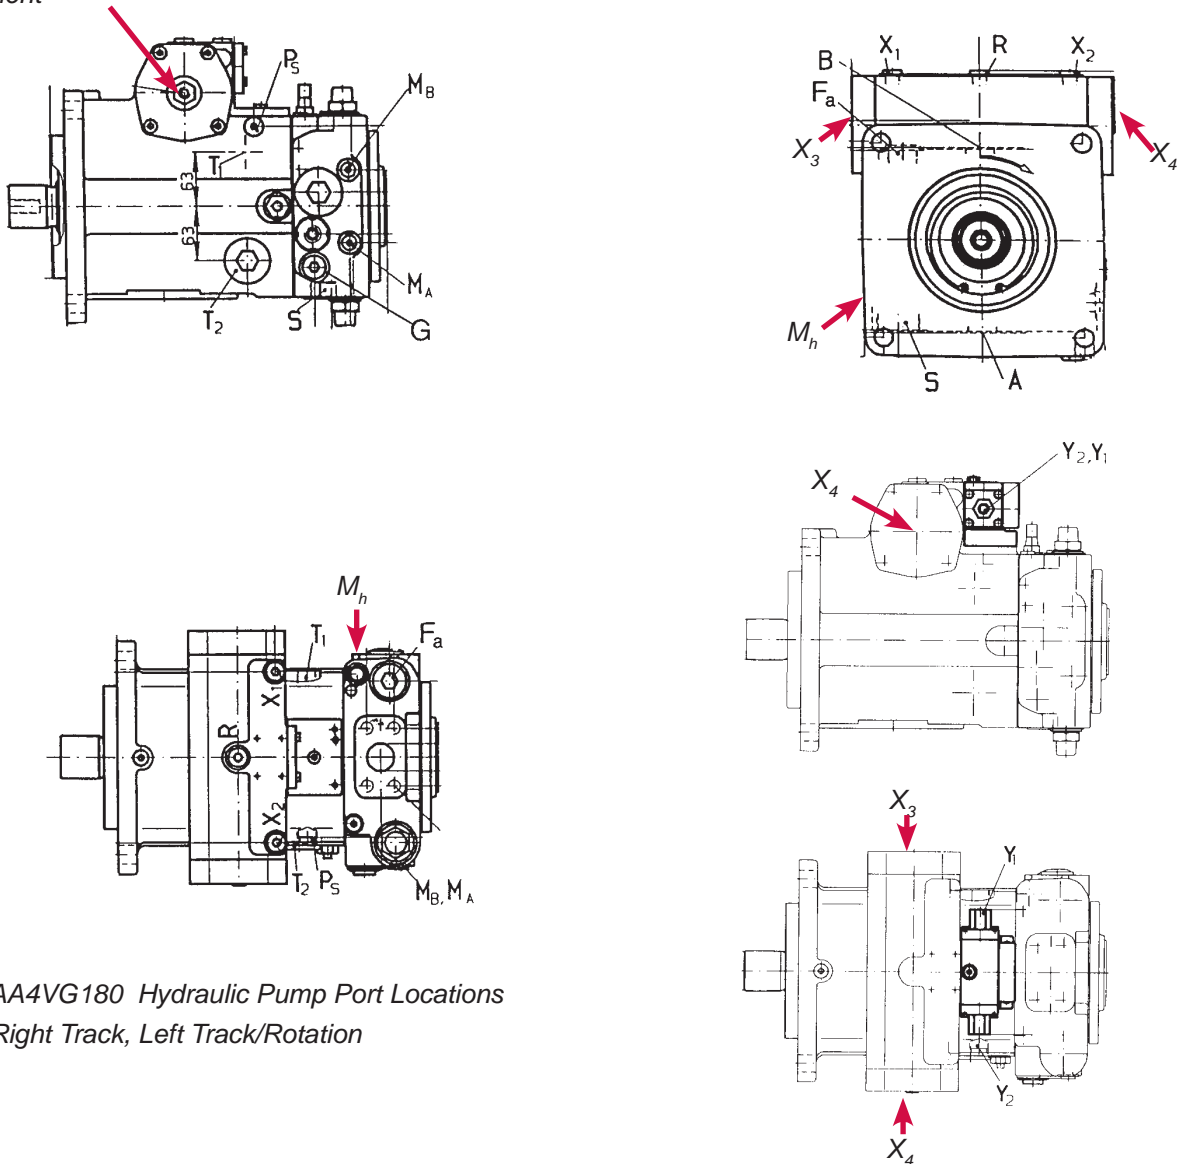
AA4VG180 Hydraulic Pump Port Locations
